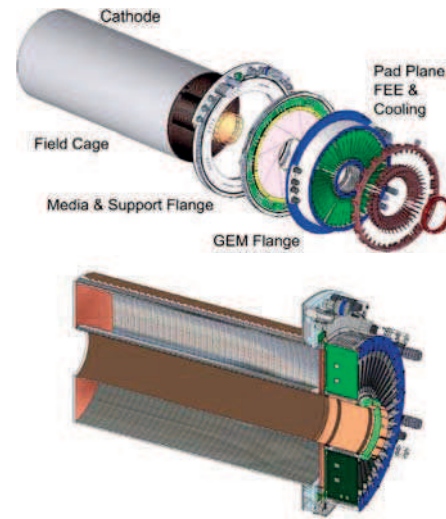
CAD exploded view (top) and cross section (bottom) of the GEM-TPC prototype.
